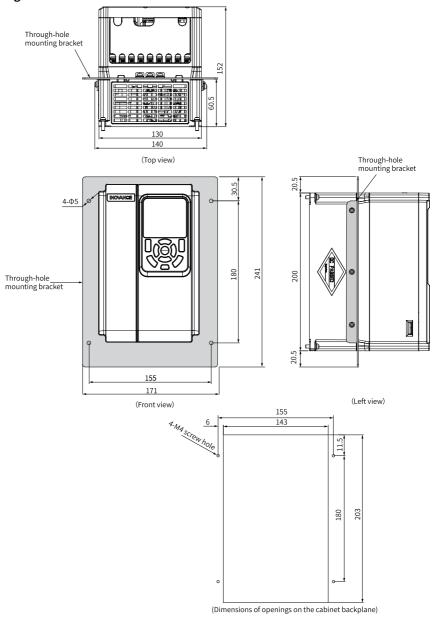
MD500-AZJ-A1T1 through-hole mounting bracket and hole dimensions (mm)
